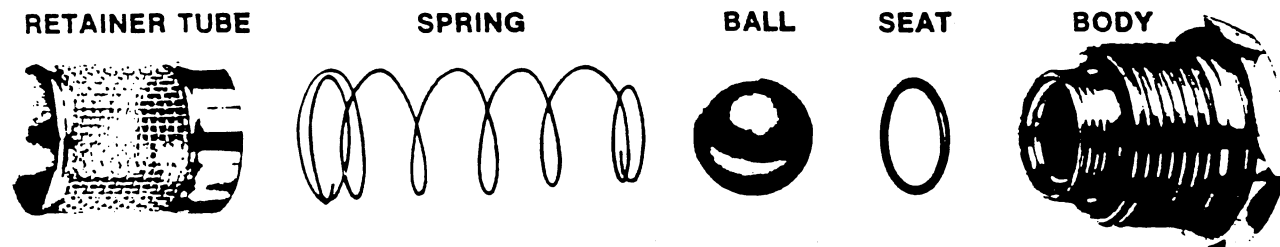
Disassembled view of Johnson Vacuum Breaker (Series VB8) showing simple rugged design.
